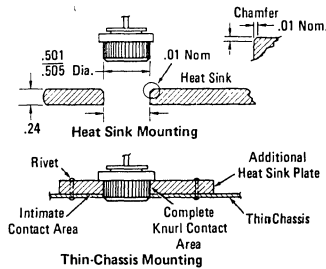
MOUNTING DETAILS FOR PRESSFIT THYRISTORS
